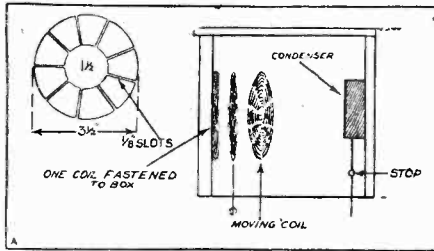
showing the cardboard coil former and the arrangement of the tuning coils.
